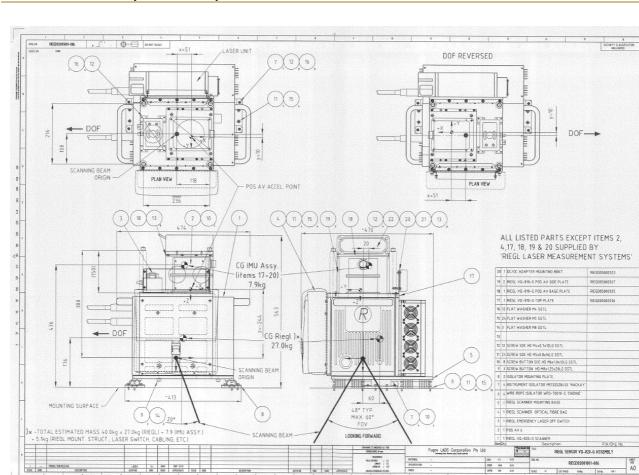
RIEGL VQ-820-G IMU mounting plate dimensions N96Y
